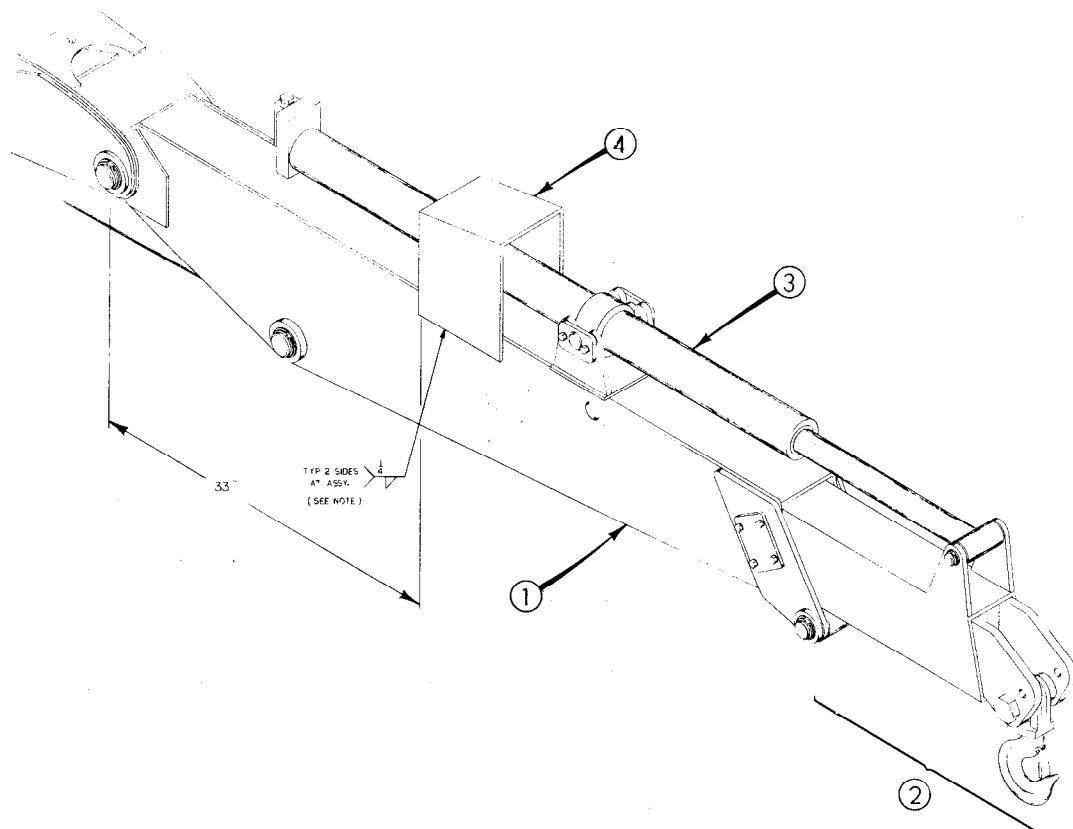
Secondary and Extension Boom - 1-Stage Hydraulic Extension
